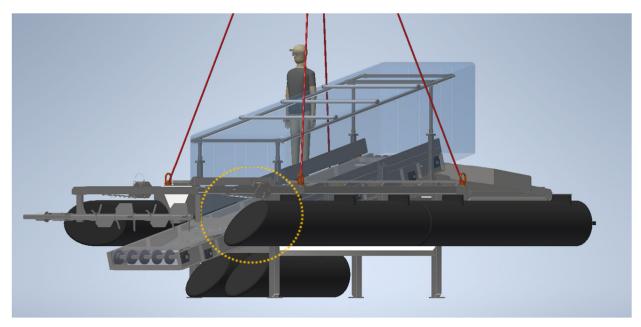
Angled view of BOWHEAD with outboard pontoon end circled.
